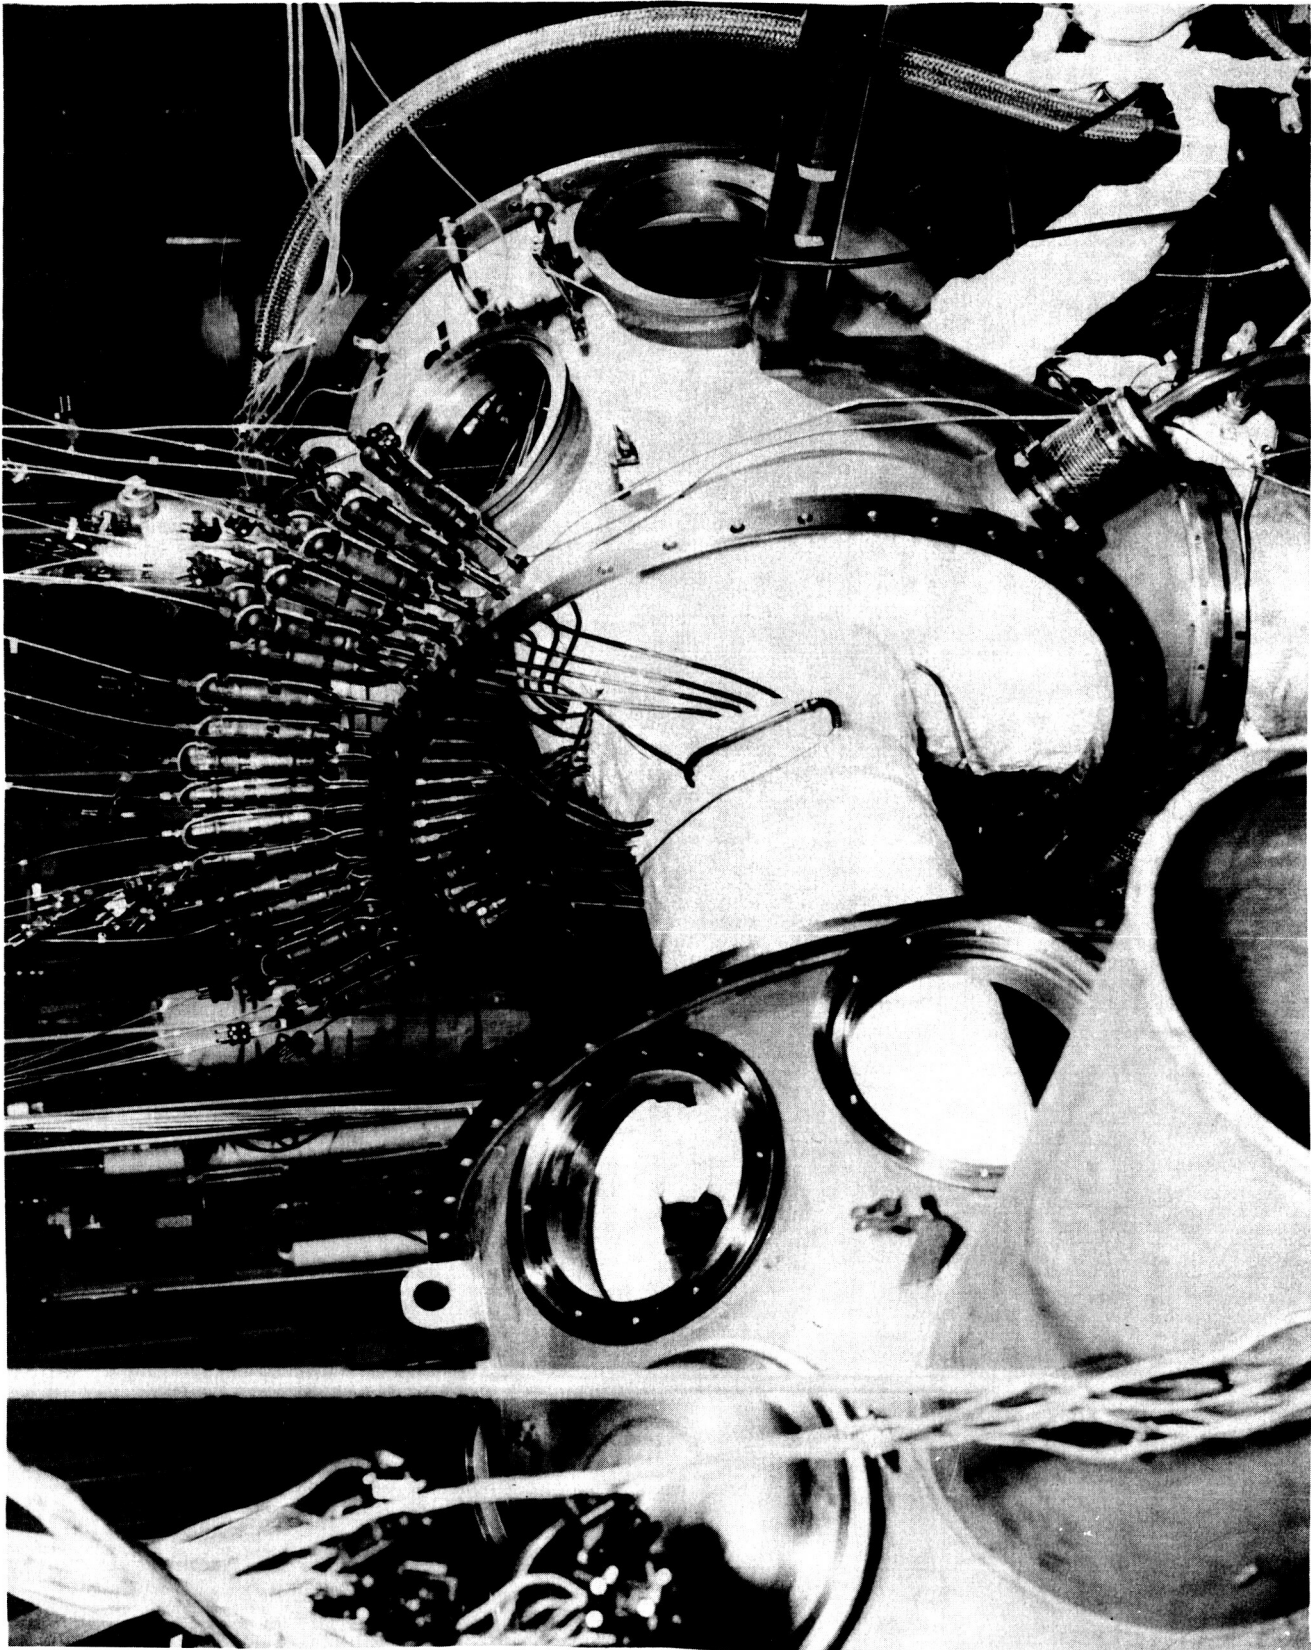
View Looking Aft of Turbine After Being Welded
